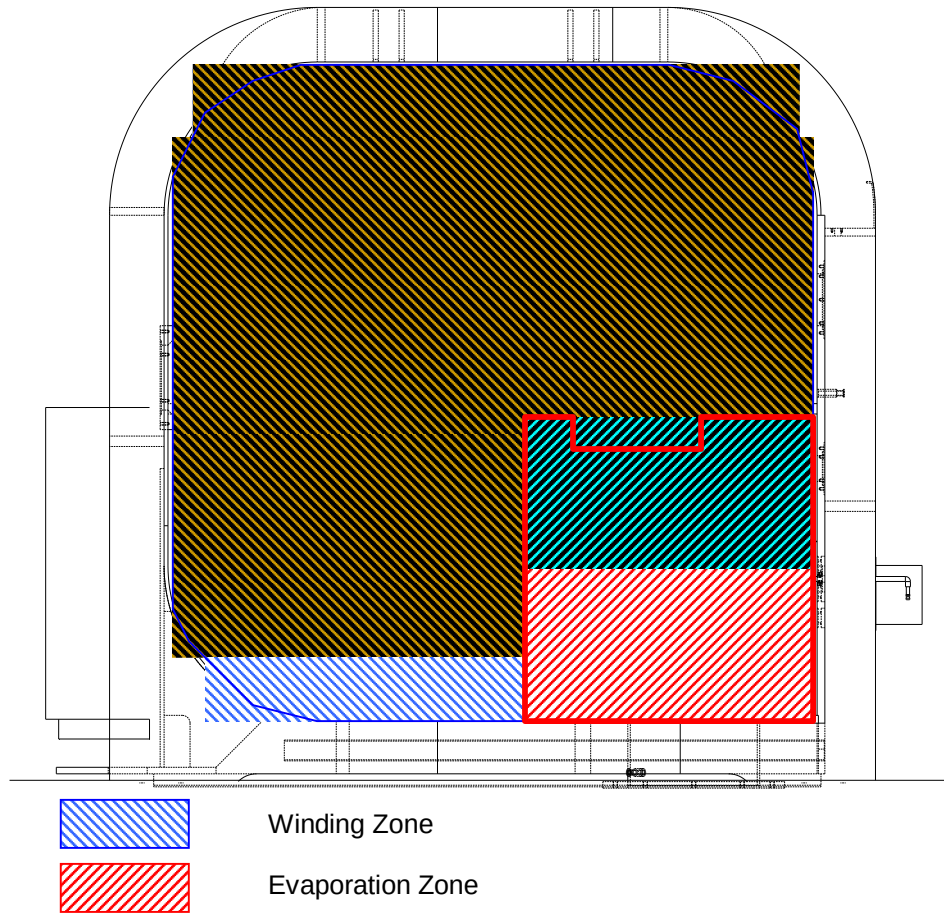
1 Drawing Showing Cross Section of Chamber indicating the Different Zones
